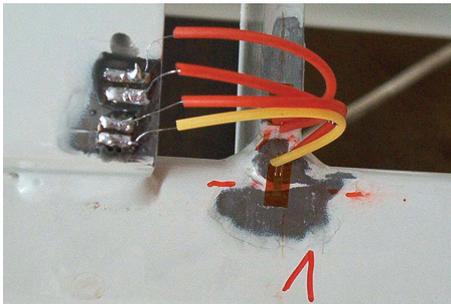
Crack in profile wall at heat affected zone margin.
